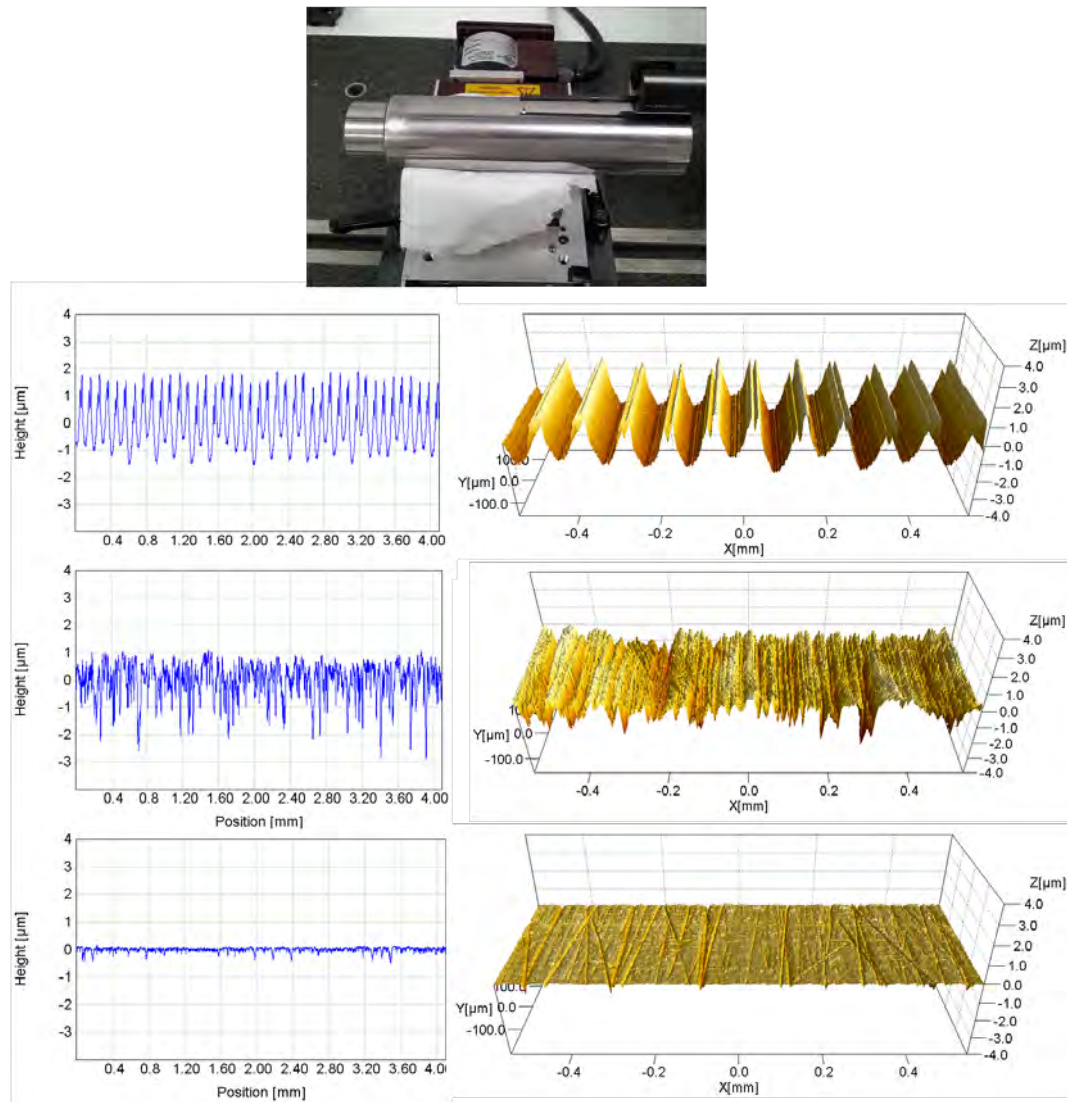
Regularly machined rods: measurement set-up, profiles and 3D topographies.
